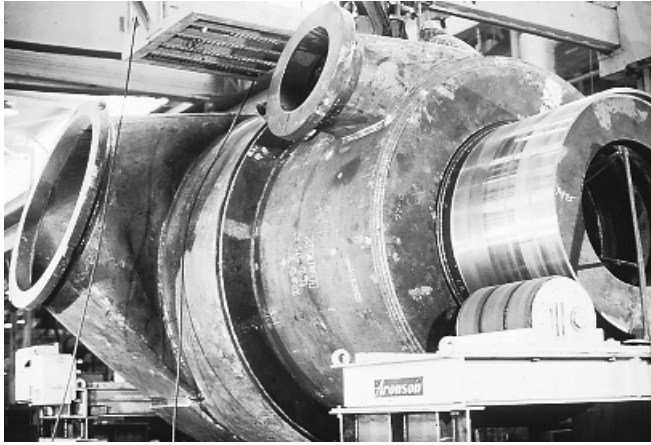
Case rotation fixturing and girth welding. (*Dresser-Rand Company, Olean, N.Y.*)
